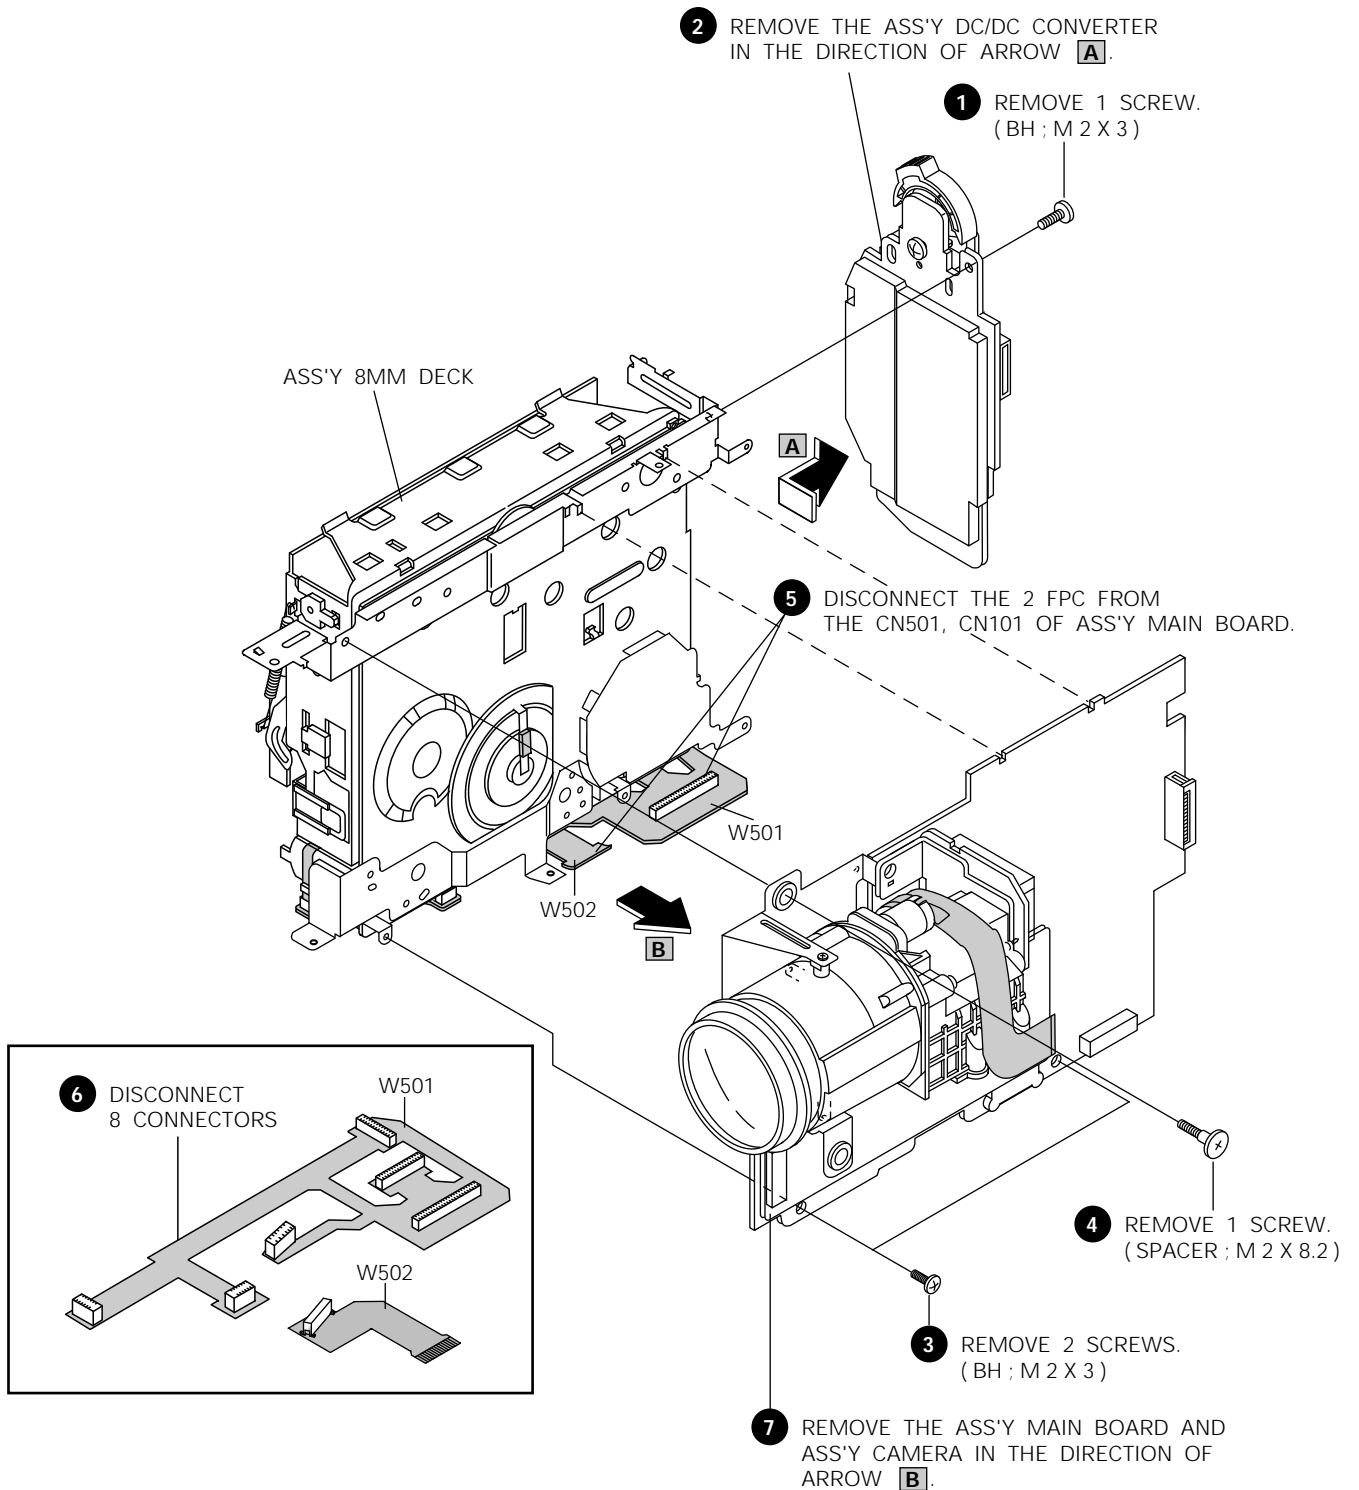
Ass'y 8mm Deck, Ass'y Main Board and DC/DC Converter Removal
